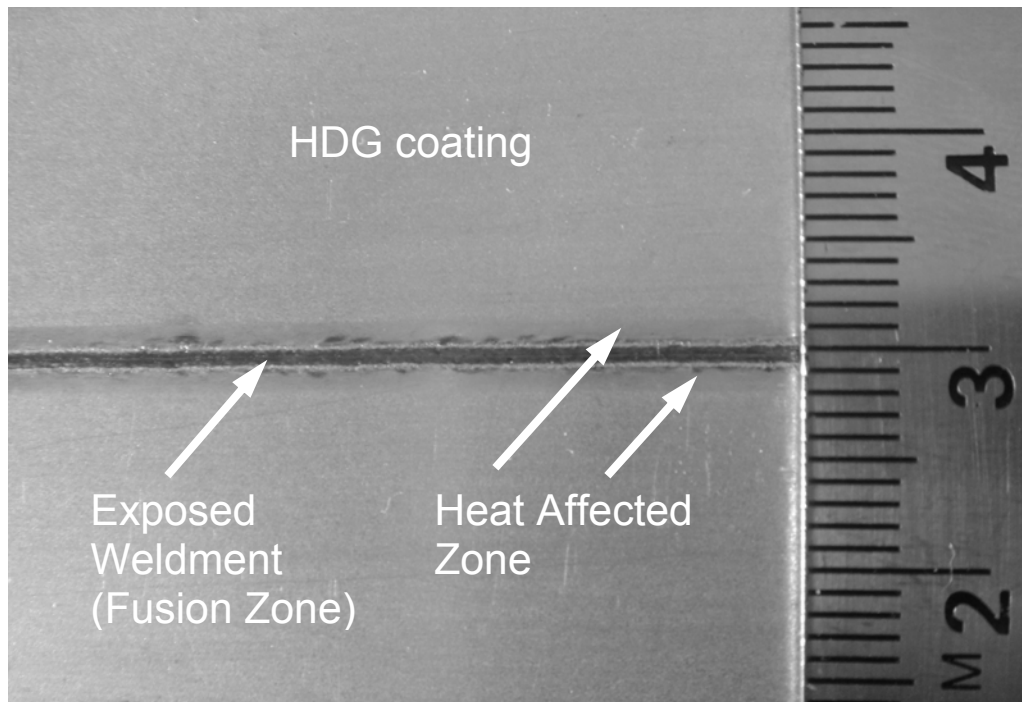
Top view of an Nd:YAG laser weldment on galvanized steel
